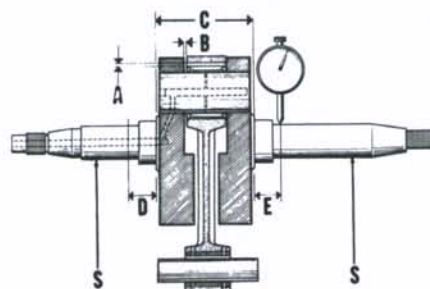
Refer to text for crankshaft and connecting rod specifications. Crankshaft should be supported near ends as shown at (S).
